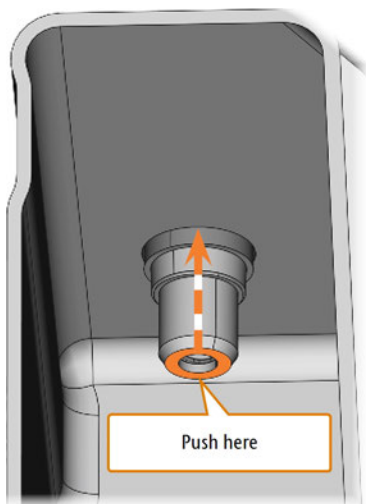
PUSHING THE COUPLING OUT OF THE TANK
